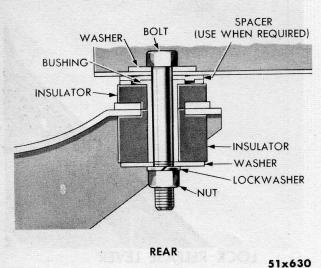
Cab Mounting Insulators (Except B-4-PW)
